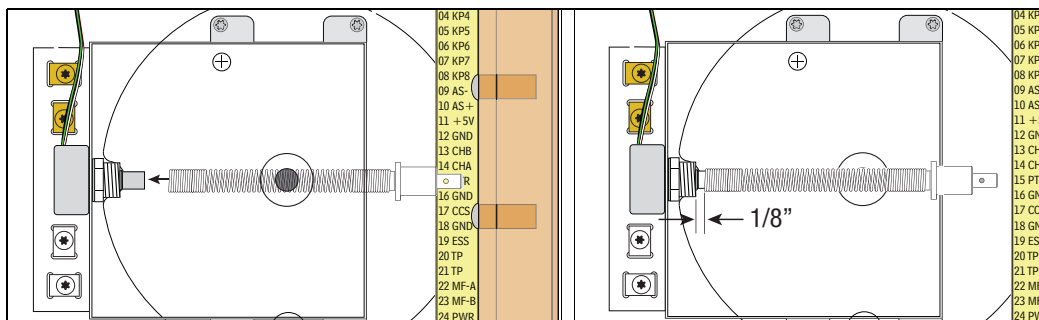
Pushing Encoder Spring Onto Pulse Encoder Shaft
